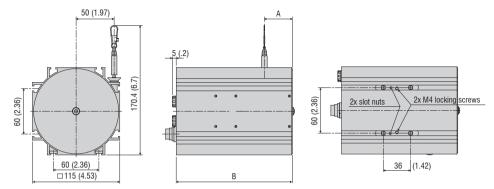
Dimensional drawing WDS- ... - P115 - U/I/P, measuring ranges 7500, 10000, 15000 mm, dimensions in mm (inches, rounded-off)
